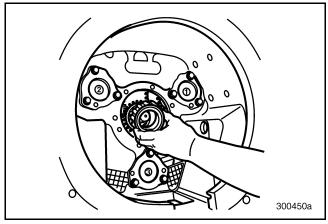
Aligning Pinion Cover Oil Hole with Hole in Case
